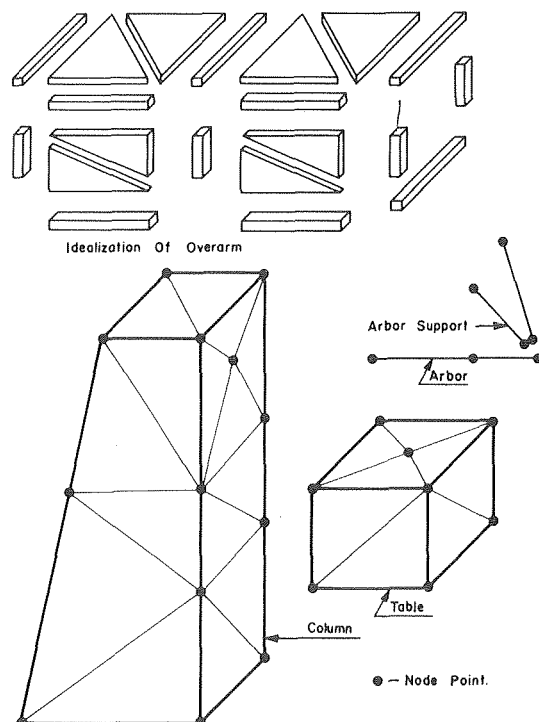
Finite-Element Modelling of Horizontal Milling Machine (Examples 3(a) and 3(b))
